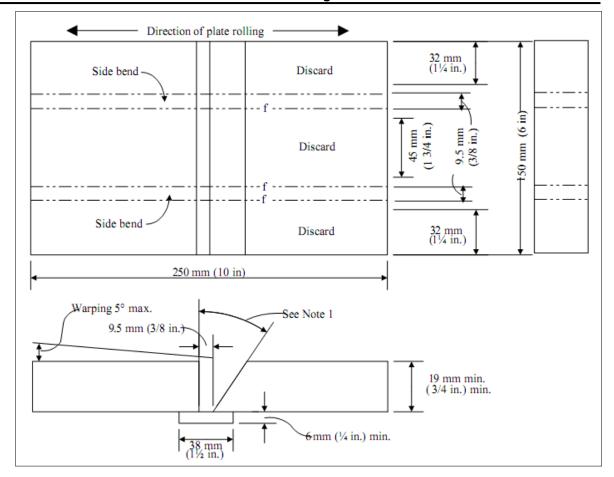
Welder qualification test No. Q2 For materials of any thickness.
